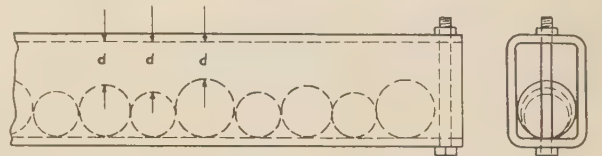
SINGLE-UNIT RECTANGULAR TUBE-TYPE ACCELERATION DAMPER
